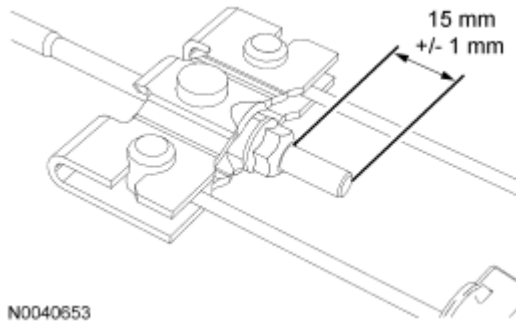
Identifying Parking Brake Adjustment Nut Dimension
